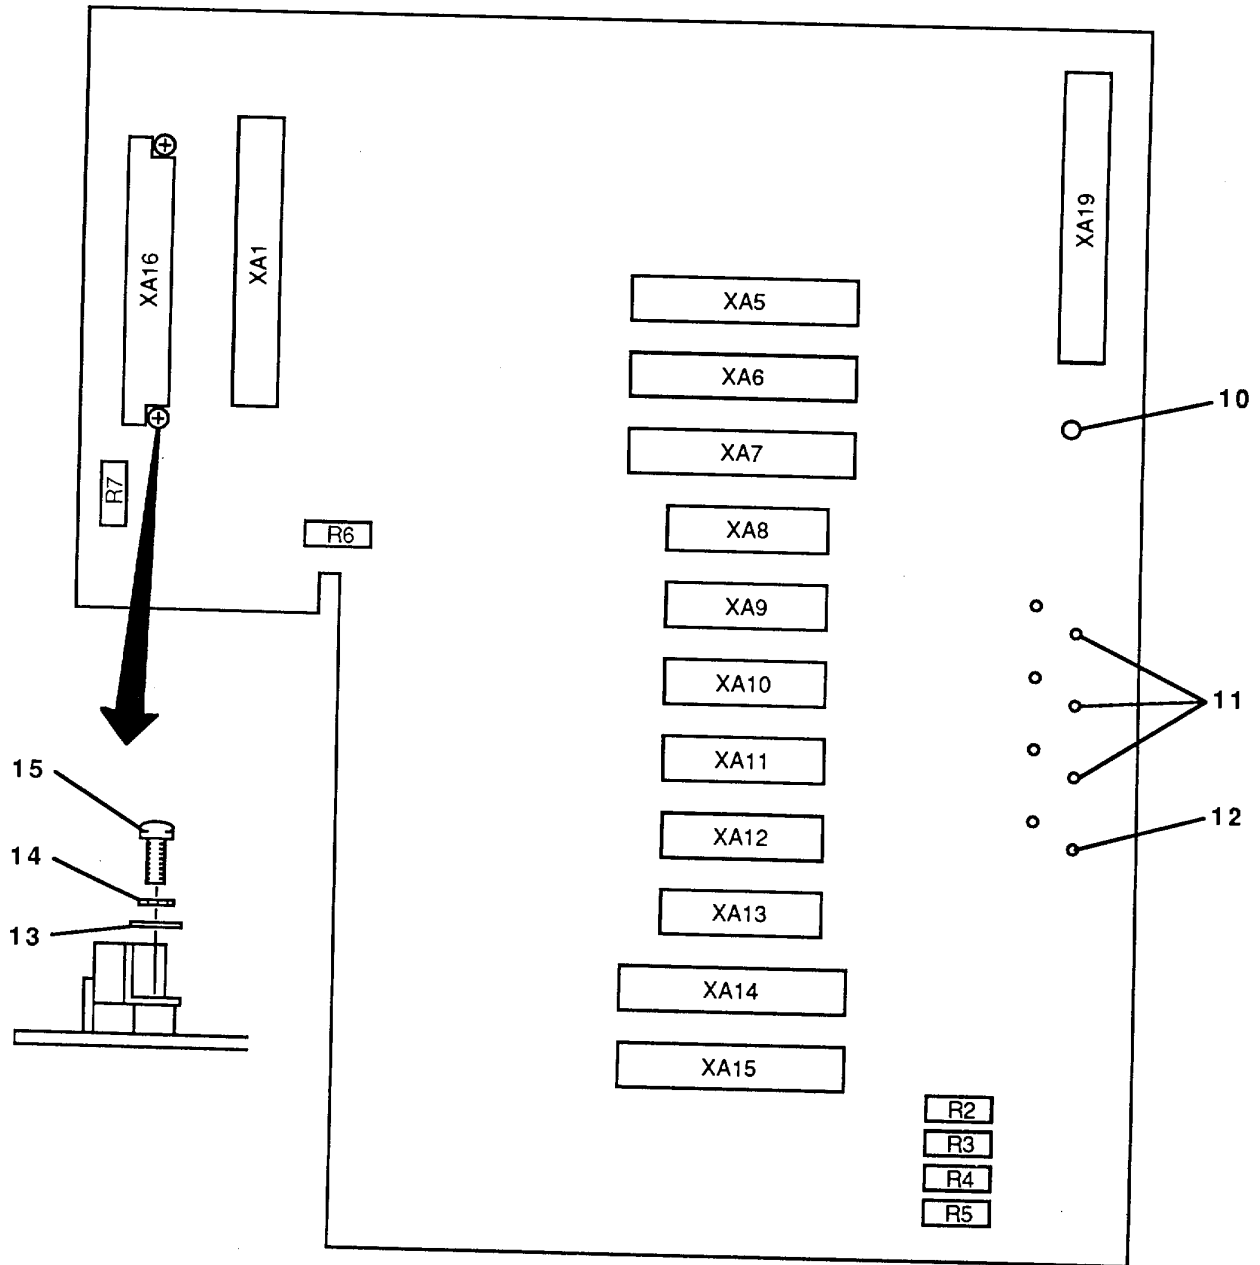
Motherboard Circuit Card Assembly (Sheet 1 of 2).
